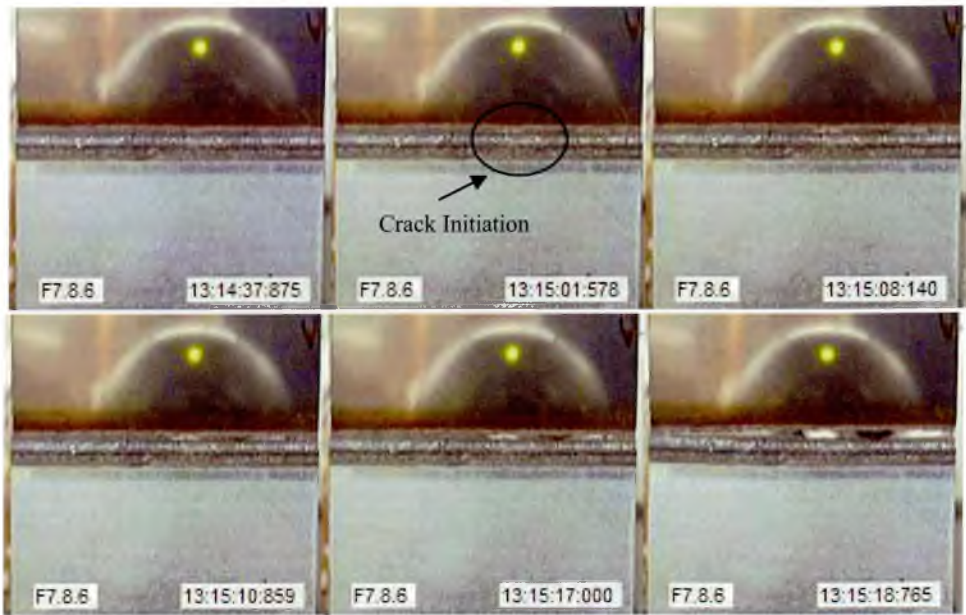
A series of still photos from the video capture of the fatigue test F7.8.6 showing the location, initiation and propagation of the fatigue crack.
